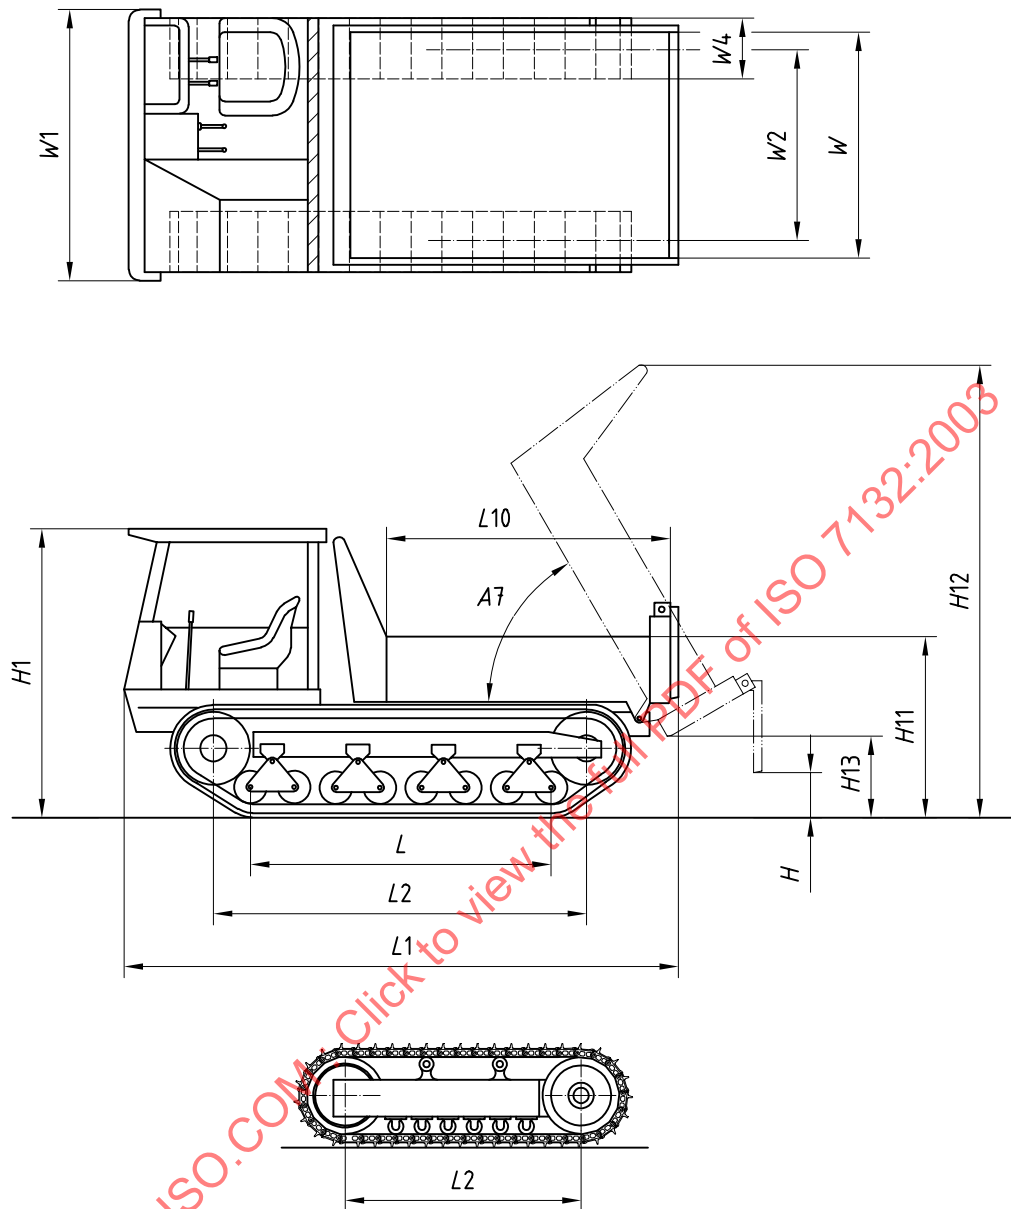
Dimensions of crawler compact dumper — Front operator position
